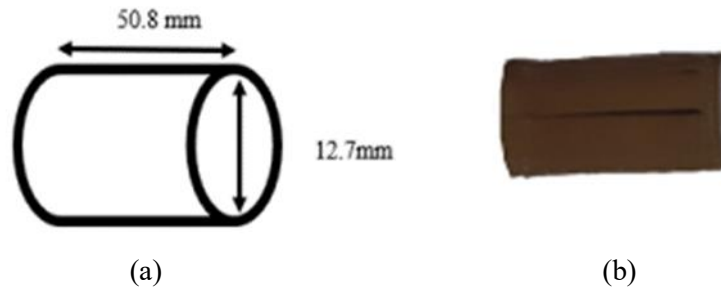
(a) Specimen geometry and dimension according to ASTM D695 standard (b) A sample of printed compression specimen
